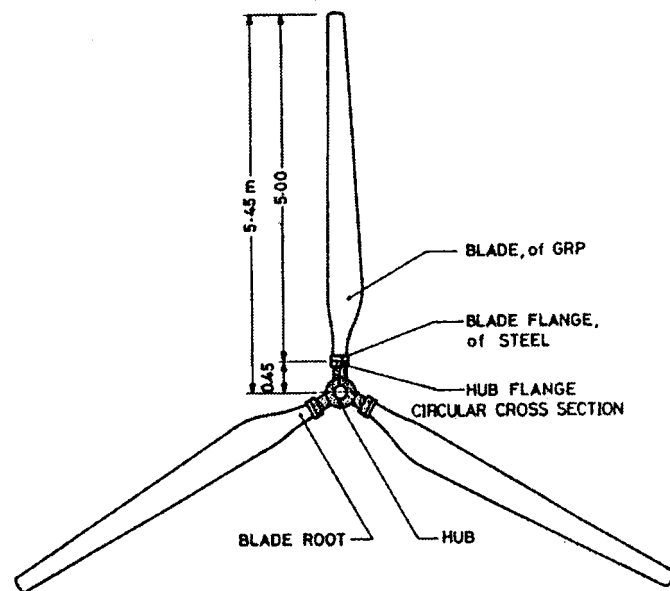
Three blade rotor assembly showing the hub and the blades.
